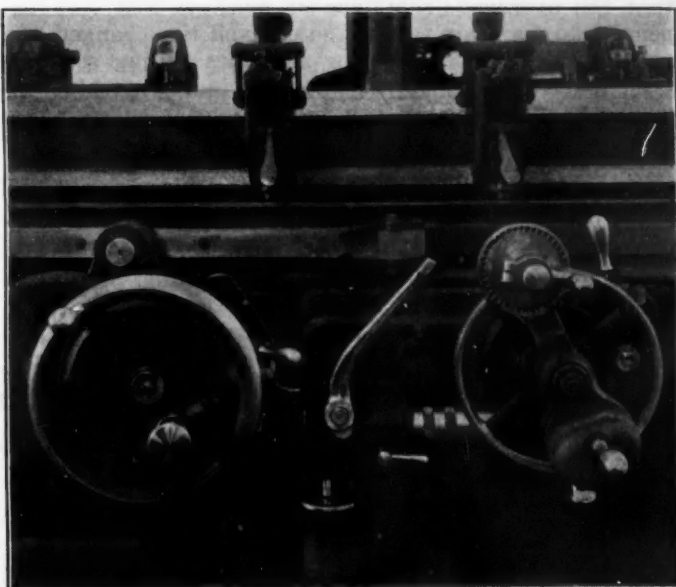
THE AUTOMATIC WHEEL IN-FEED MECHANISM OF THE MACHINE ILLUSTRATED IN FIG. 13
